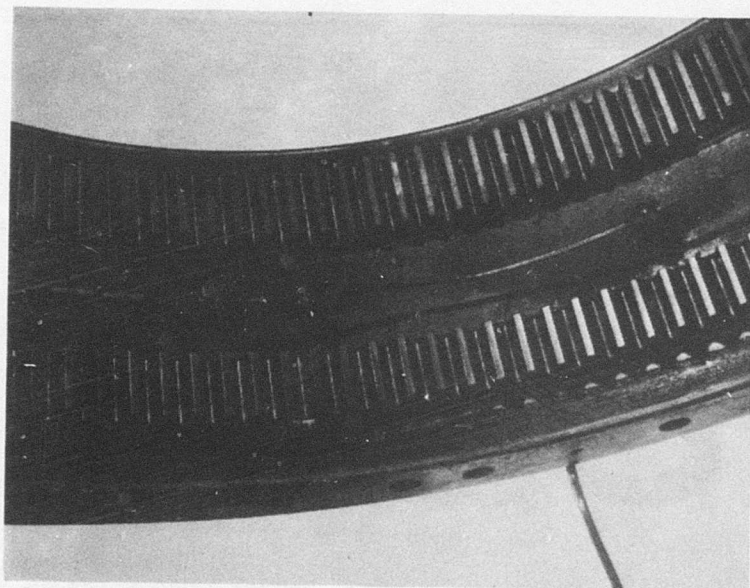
Upper and lower ring gear following 4.0-hour emergency lubrication run.
